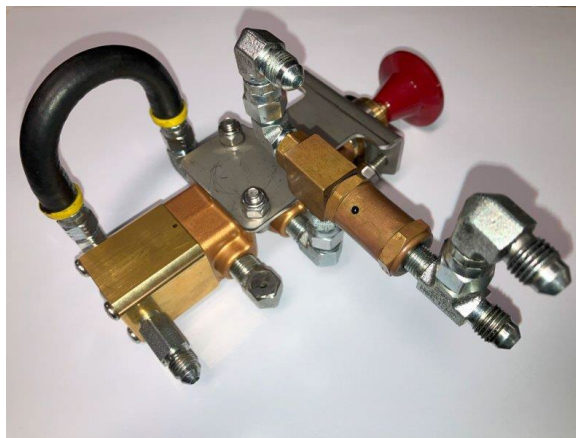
New Park Brake Valve assembly underneath view showing park brake on/off pilot valve installation.
